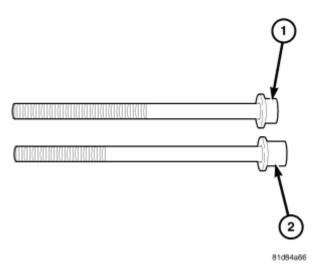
CYLINDER HEAD BOLT IDENTIFICATION Courtesy of CHRYSLER LLC
